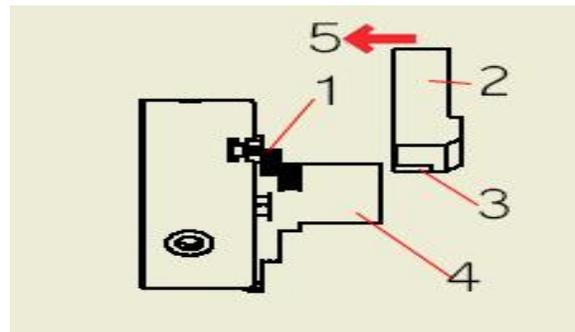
Mechanism of Cutting Process in CNC Turning. (1.Chuck, 2.Tool holder 3.Cutting tool insert, 4. Workpiece 5. Cutting motion)
